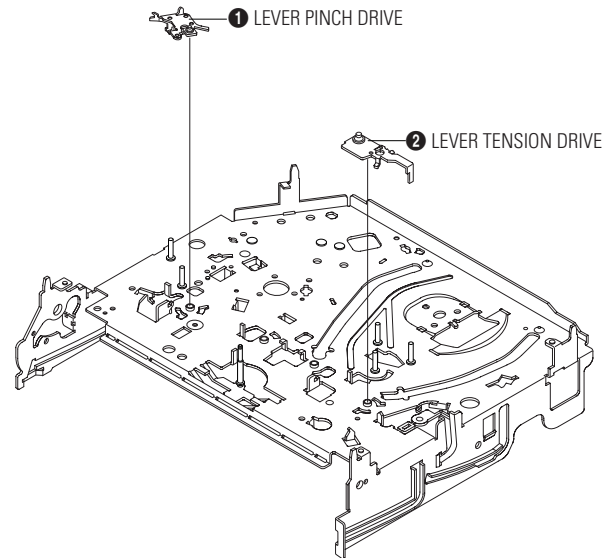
Lever Pinch Drive, Lever Tension Drive Removal
